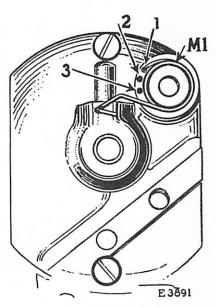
Adjusting Tension on Idler Pulley of BT Motor
